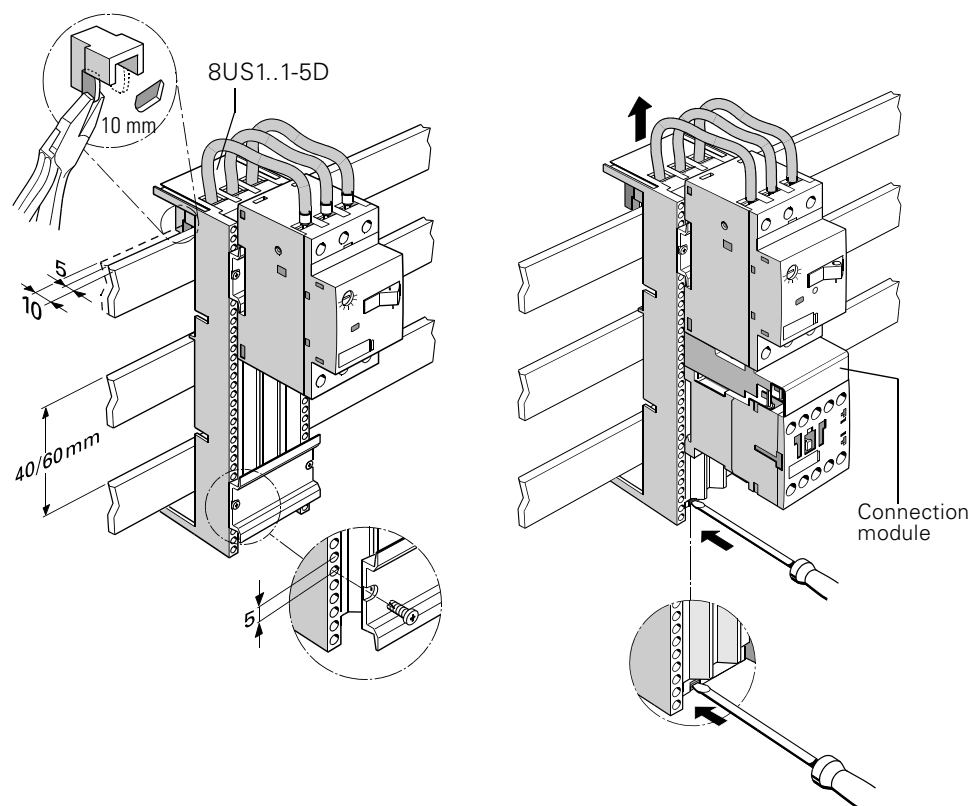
Mounting circuit breakers on busbar adapters (frame sizes S00 and S0)
